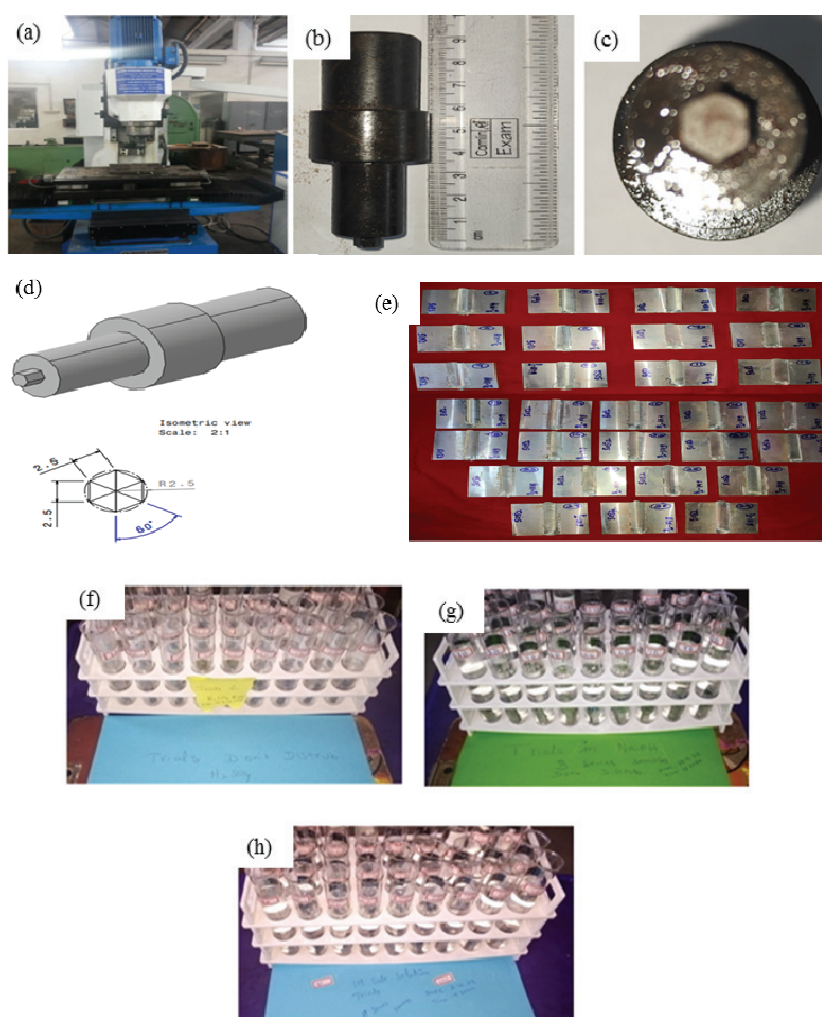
a) Welding machine, b) spindle tool dimension, c) ALU spinner of FRSTW process, d) pin profile dimension, e) welded samples prepared FRSTW test samples in: f) 1 M  $\text{H}_2\text{SO}_4$ , g) 1M NaOH and h) 1 M salt solution for weight loss investigation.
